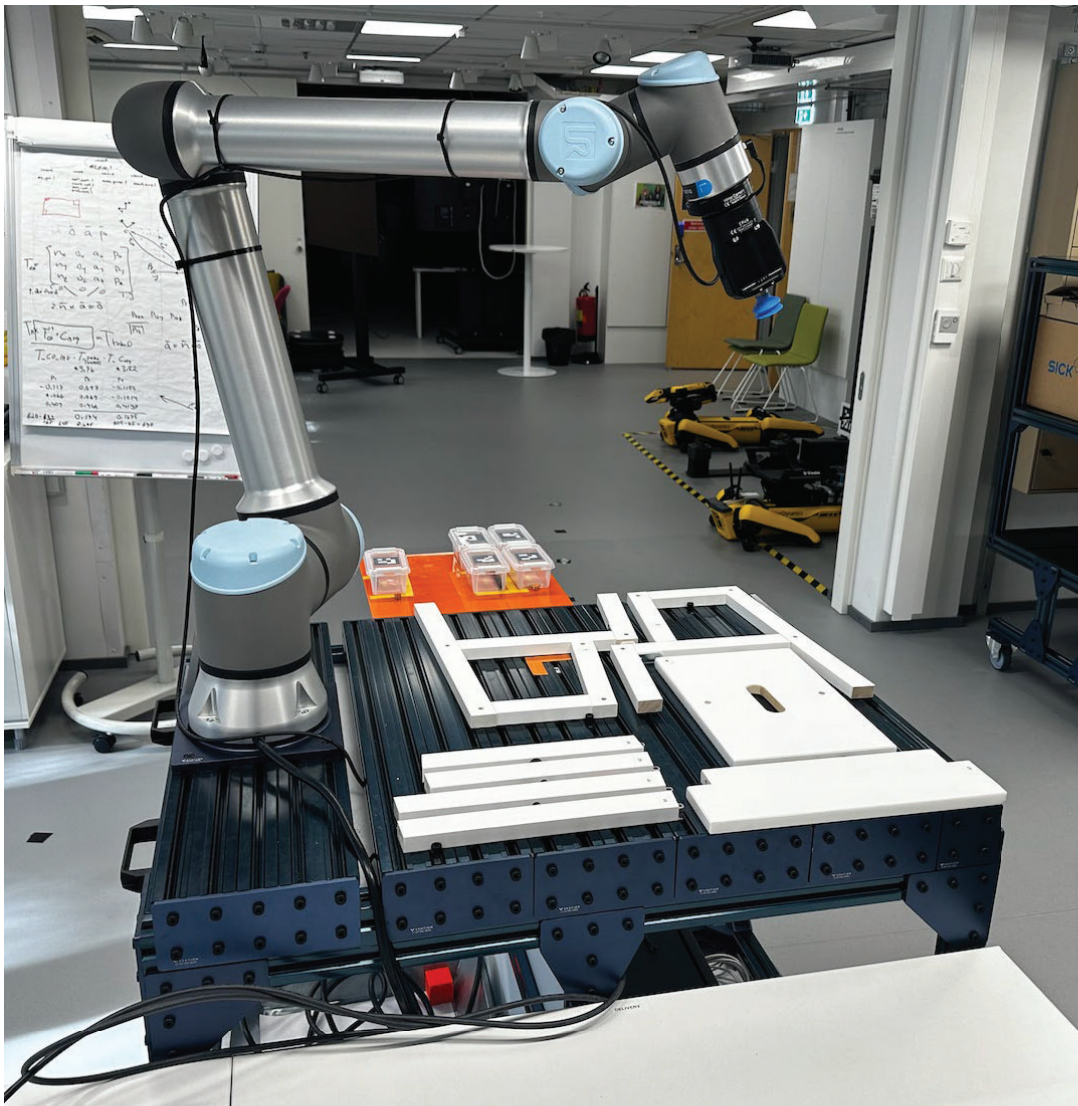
UR10e cobot cell for IKEA step stool assembly.
